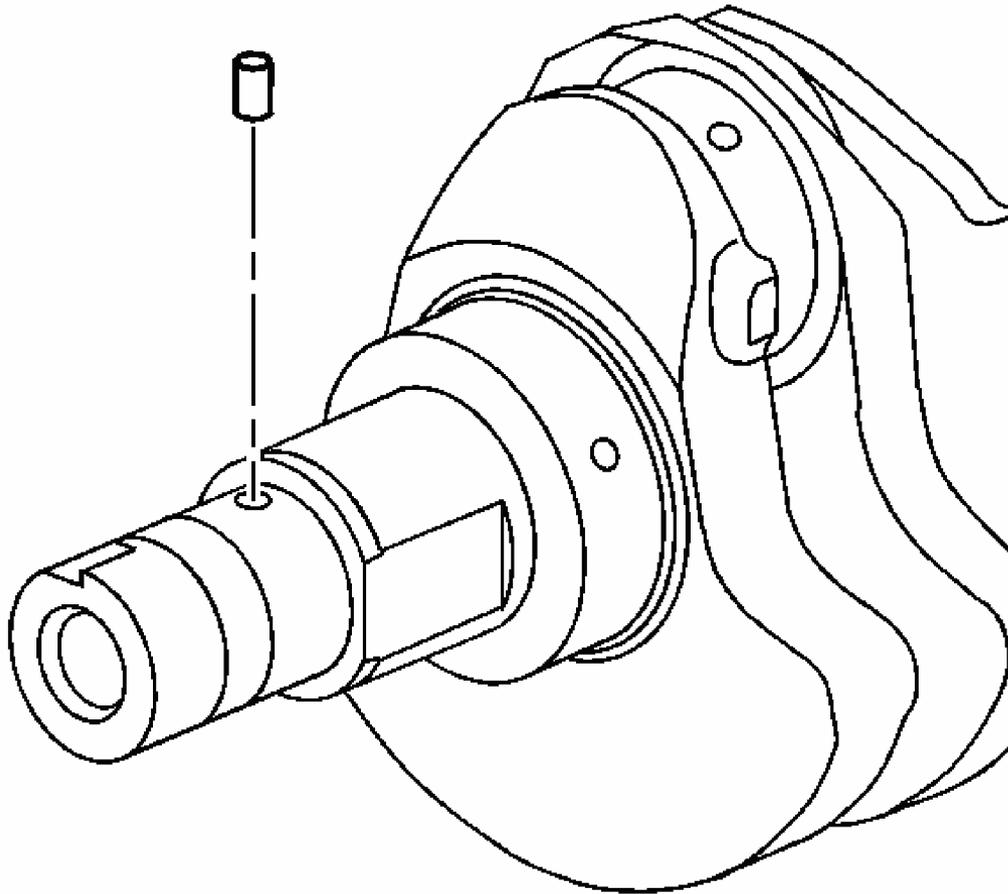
Locating Crankshaft Sprocket Drive Pin
